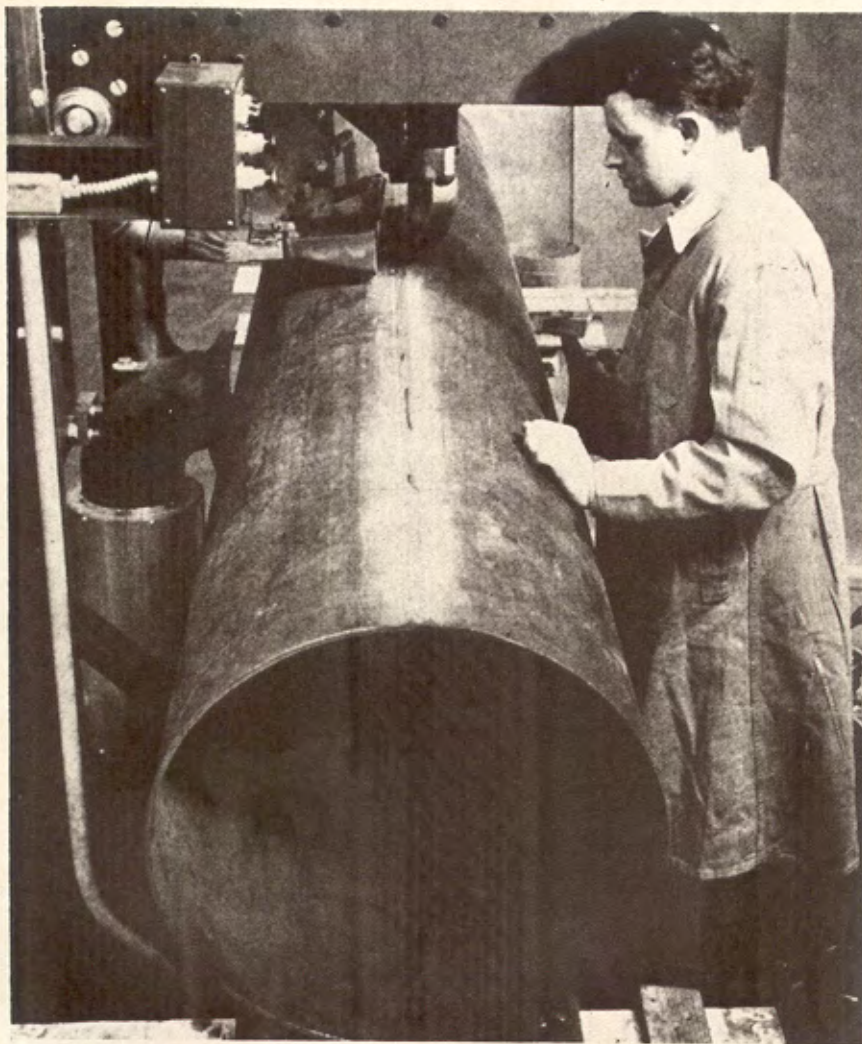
Magnaflux Automatic Dry Magnetic-Particle Inspection Unit for Resistance-Welded Line Pipe, Installed on Pipe Mill. Prompt detection of weld defects permits immediate correction of welding operation and repair of defects prior to hydrostatic proof test. (Courtesy Magnaflux Corp., Chicago, Ill.)
